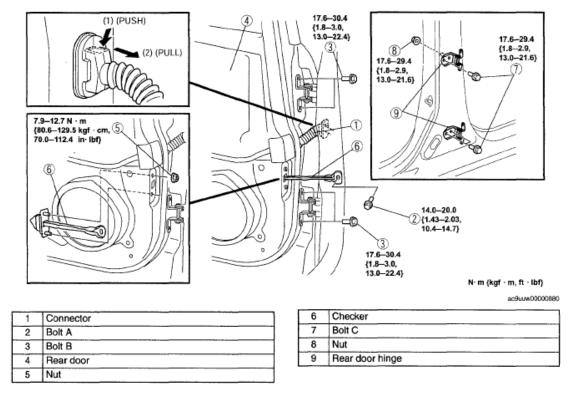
Identifying Rear Door Components & Torque Specifications Courtesy of MAZDA MOTORS CORP.
